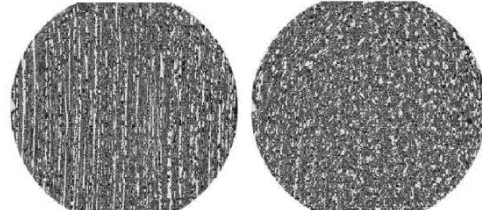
Drilled steel 15230.3 surface morphology (sharp and worn-out tool)
